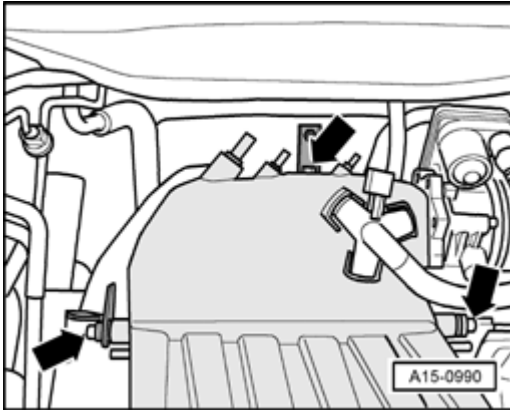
Removing Rear Securing Bolts For Intake Manifold
